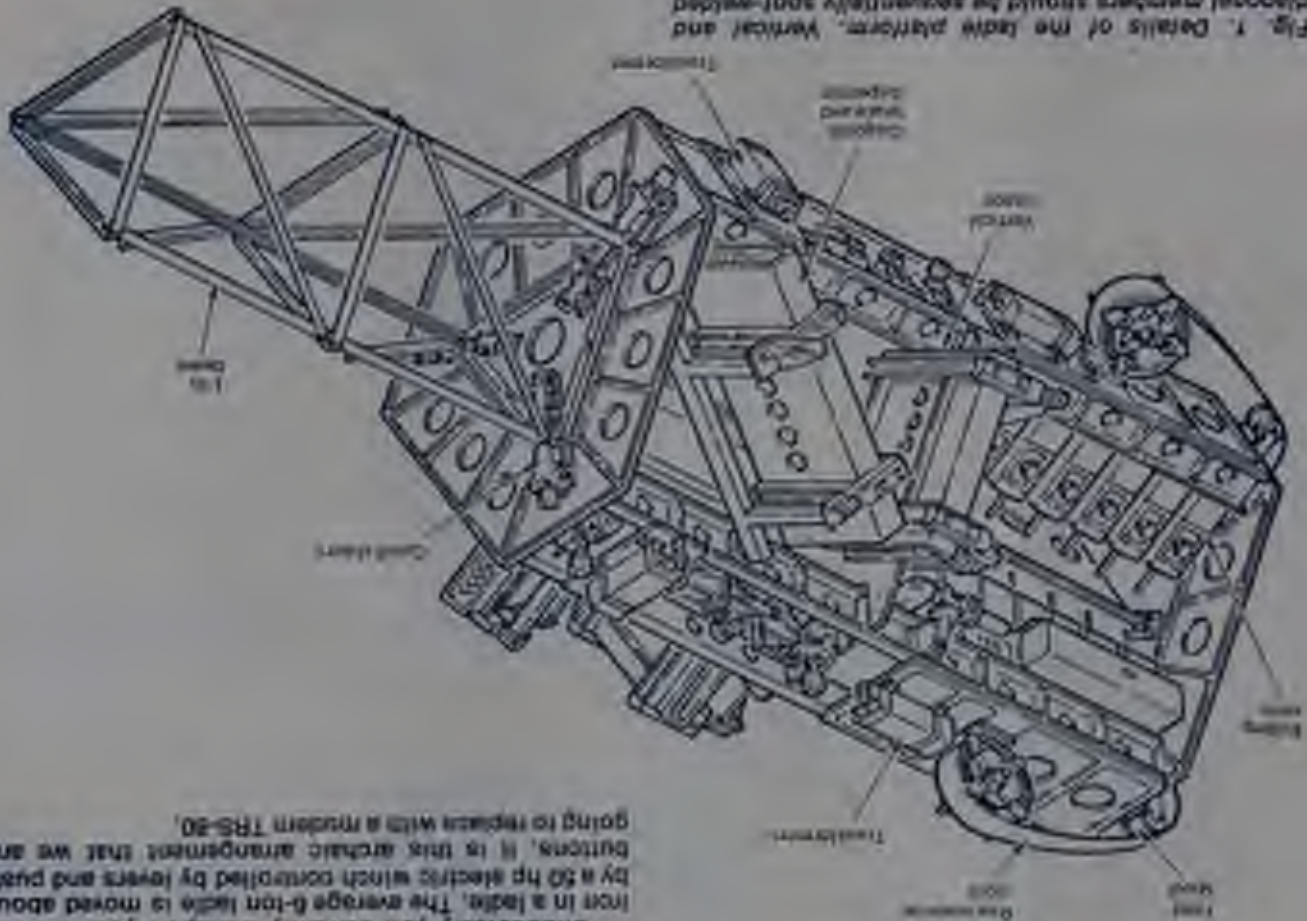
Details of the ladle platform. Vertical and diagonal members should be sequentially spot-welded to the beam.
